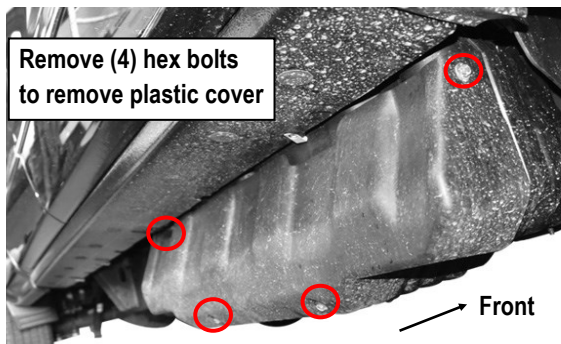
07-16 Passenger Side Front Pictured with DEF Tank Cover
